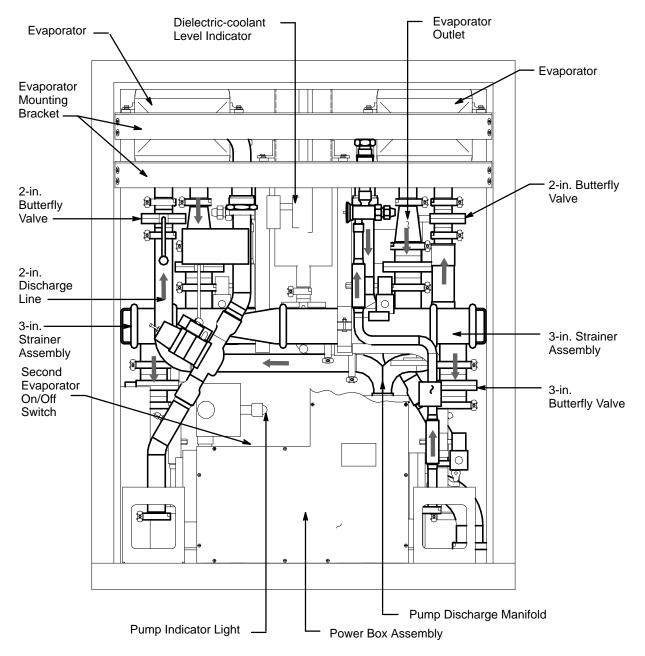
HEU-T3D Dielectric-coolant Component Locations (Front View)
